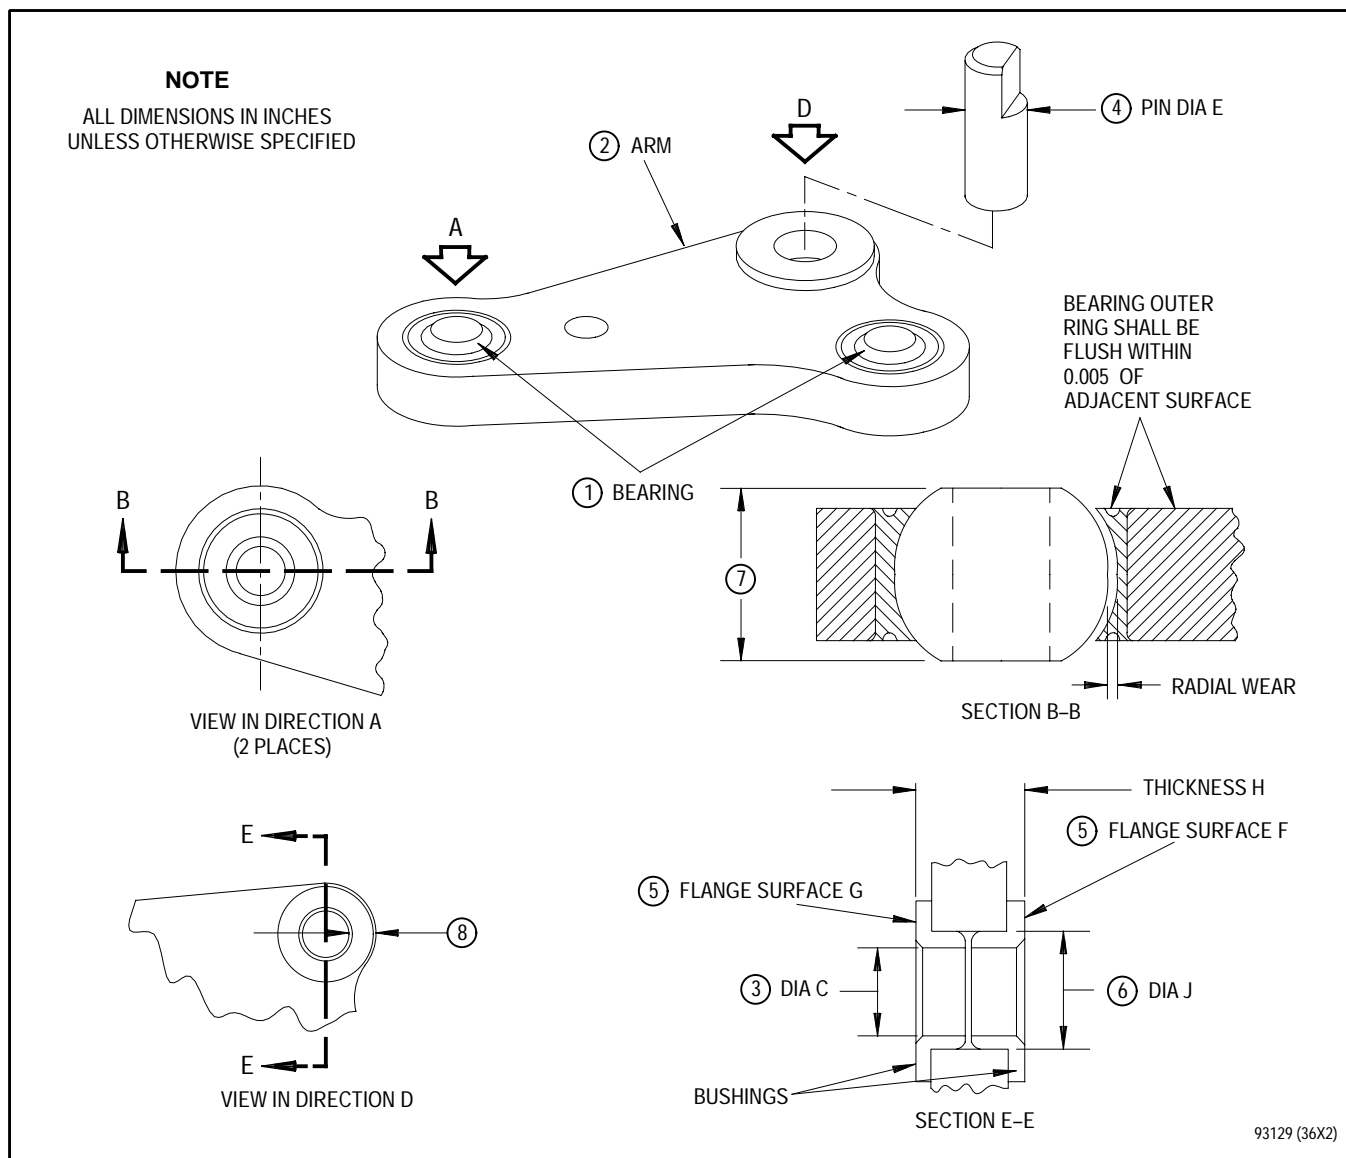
Inlet Front Compressor Stator Bell Crank Linkage Assembly - Inspection
